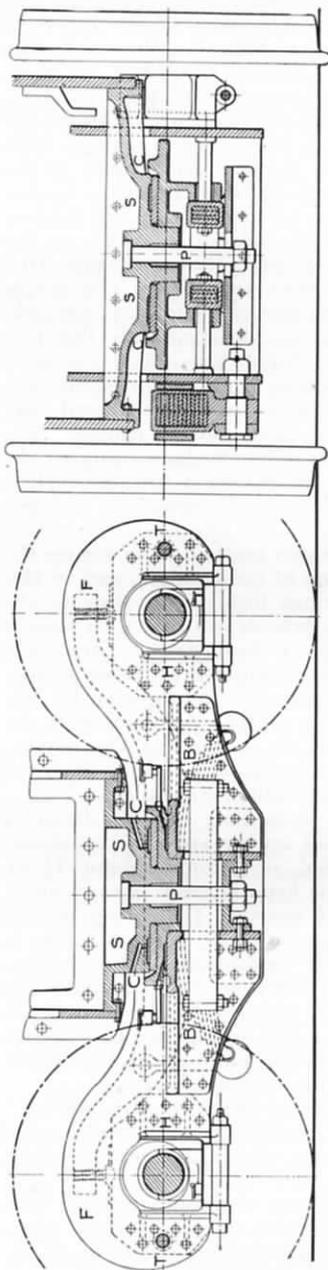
DETAILS OF LOCOMOTIVE BOGIE TRUCK.
